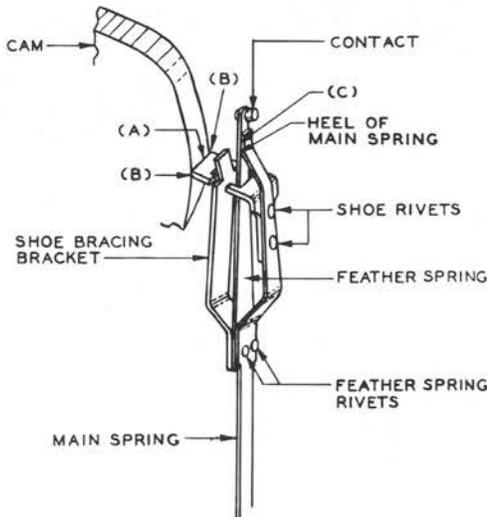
Position of Shoe on Cam Assembly With Shoe Bracing Bracket
